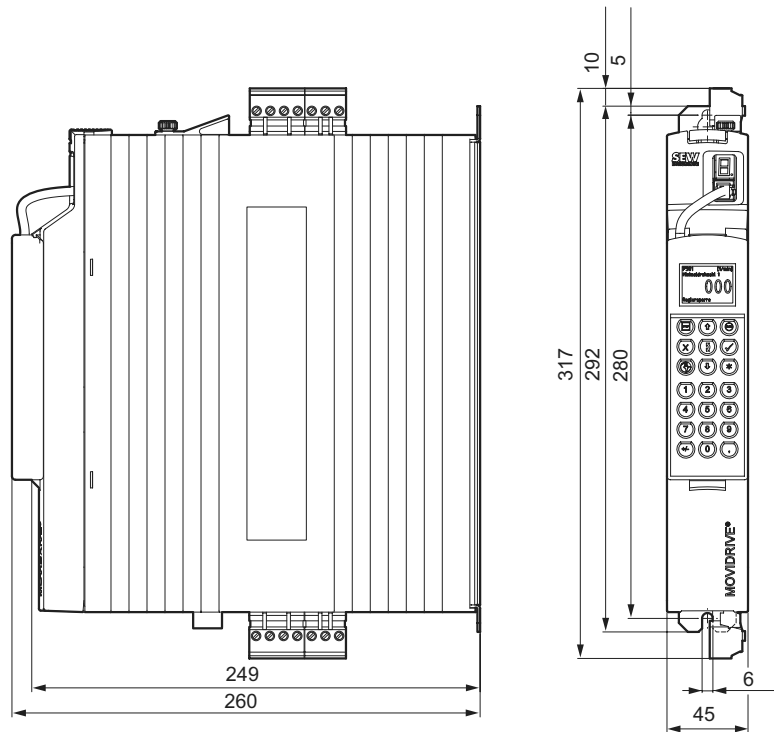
Dimension drawing for MDX60B size 0S, dimensions in mm
